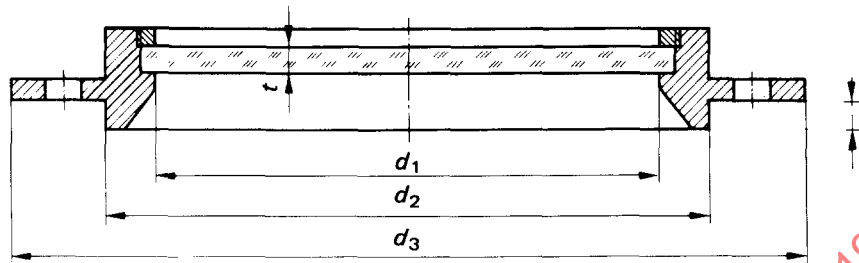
Non-opening side scuttle without deadlight, bolted
